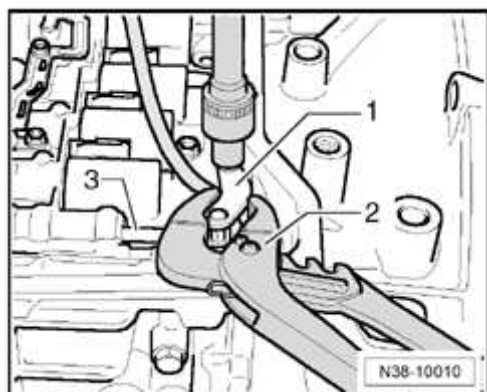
Remove/Install Selector Lever On Selector Shaft
